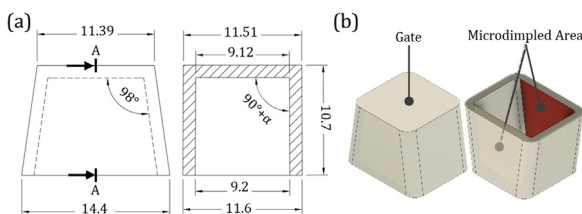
Molded sample (a) design and dimensions (in millimeters) and (b) location of the gate and micro-dimpled area.
